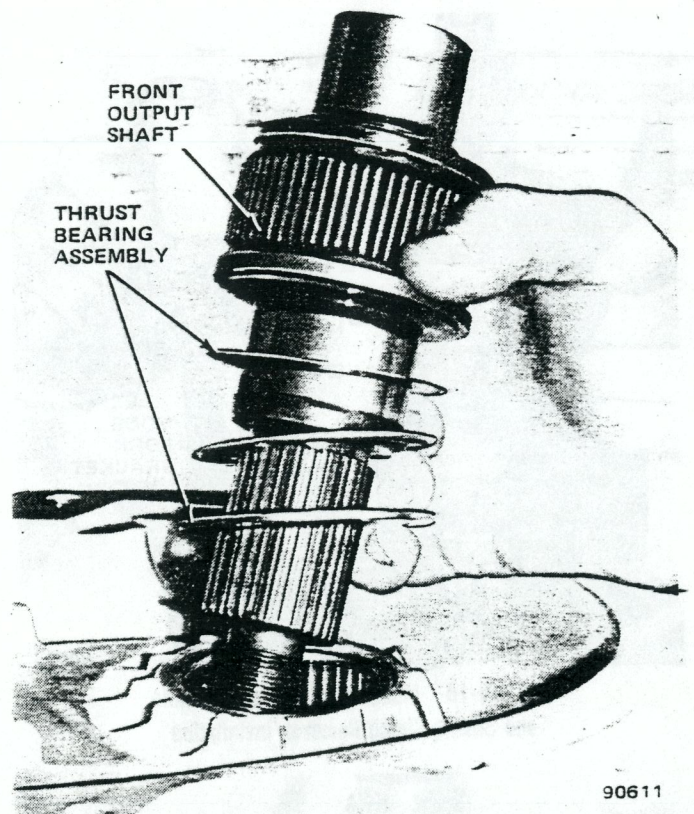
D-16 Front Output Shaft and Front Thrust Bearing Assembly Removal/Installation
